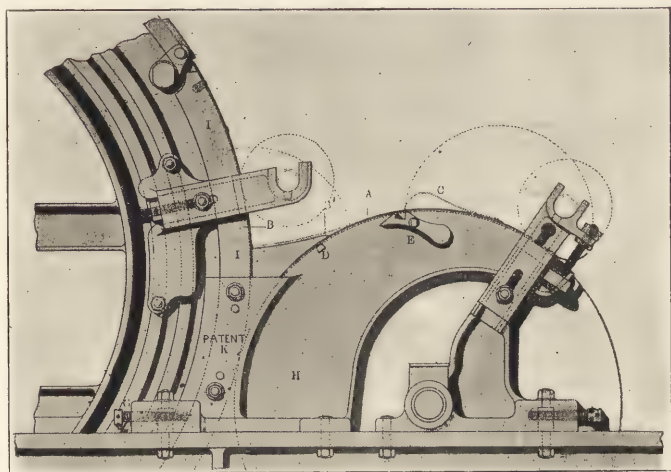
DIAGRAM SHOWING ARRANGEMENT FOR REMOVAL OF COVER WHEN GRINDING THE CYLINDER AND THE DOFFER OF THE CARD.
